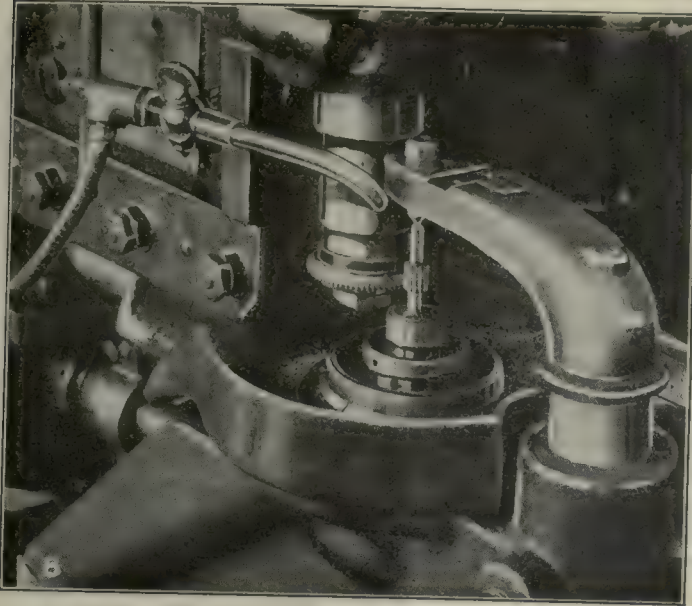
CUTTING PINIONS. FIG. 9—HOBBIING GEARS
